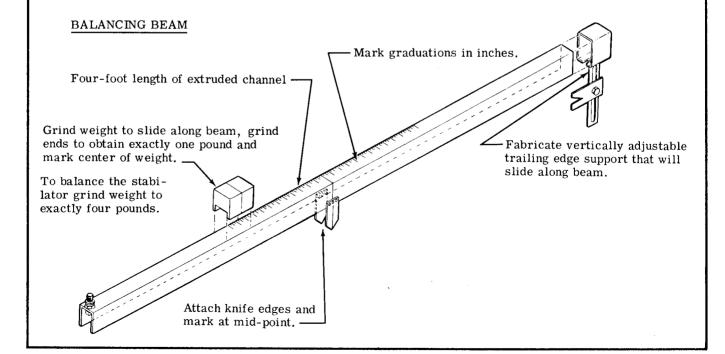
Control Surface Balancing (Sheet 1 of 4)
